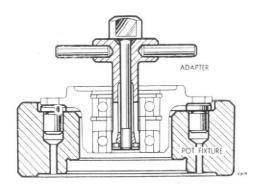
Pot fixture T.77662 and adapter T.77663 for pressing out second ball bearing from tachometer drive gear housing.
